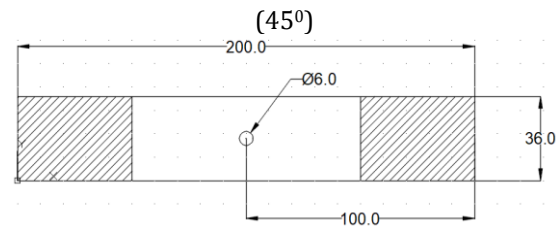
Open-hole tensile test specimen geometry in mm [19]
